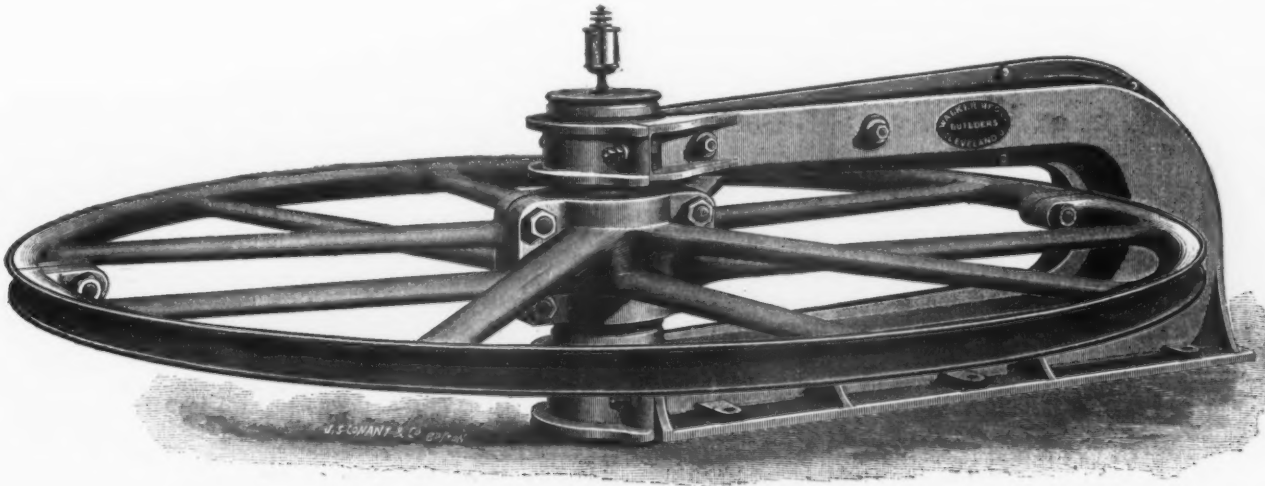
U-Frame and Sheave with Staggered Arms.
